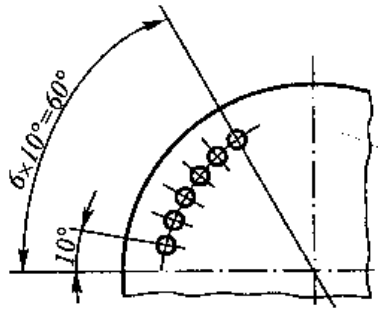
Drawing of dimensions defining the distance between evenly spaced elements
